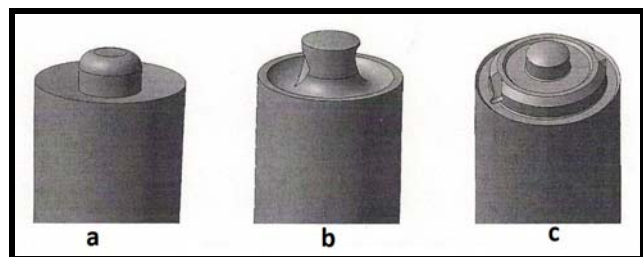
Geometry of the working parts of the welding tools - a) Tool A, b) Tool B, c) Tool C [4]
